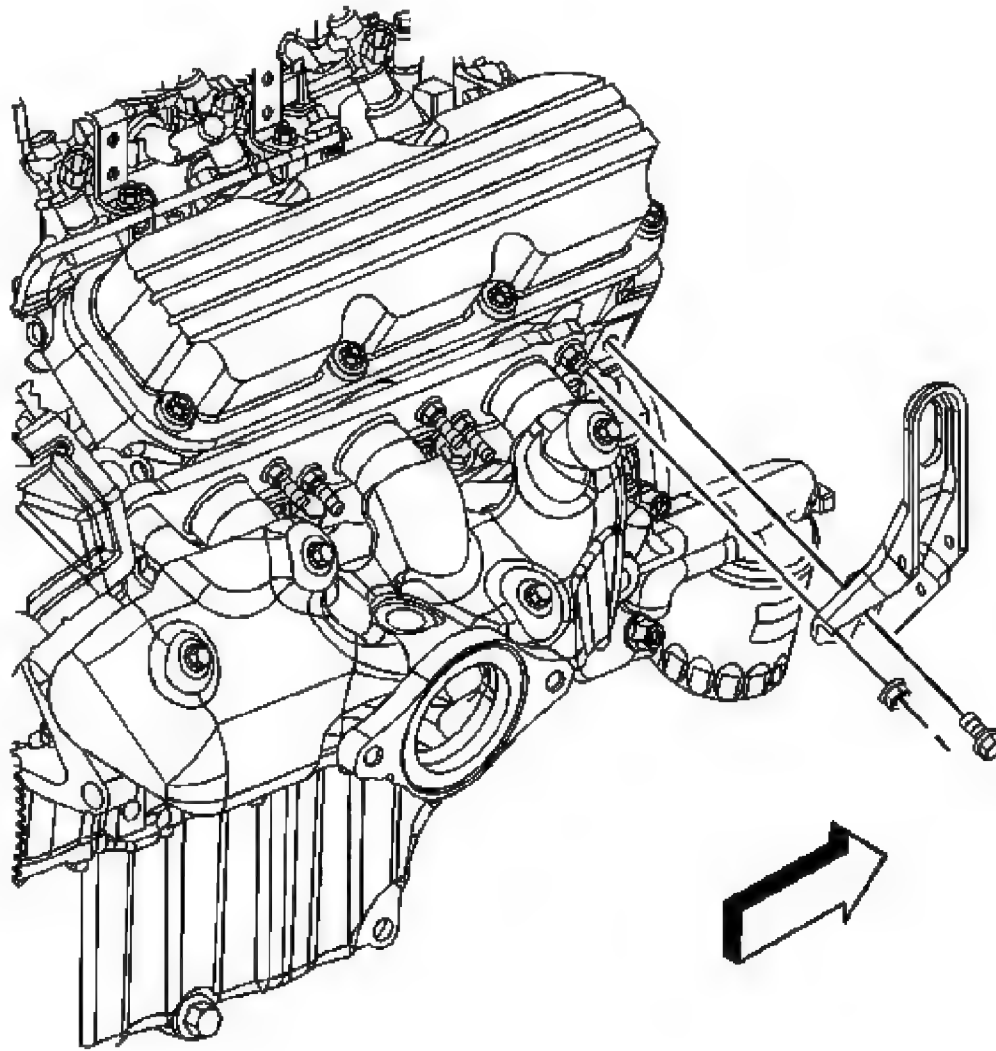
Identifying Right Engine Lift Bracket Bolt & Nut
